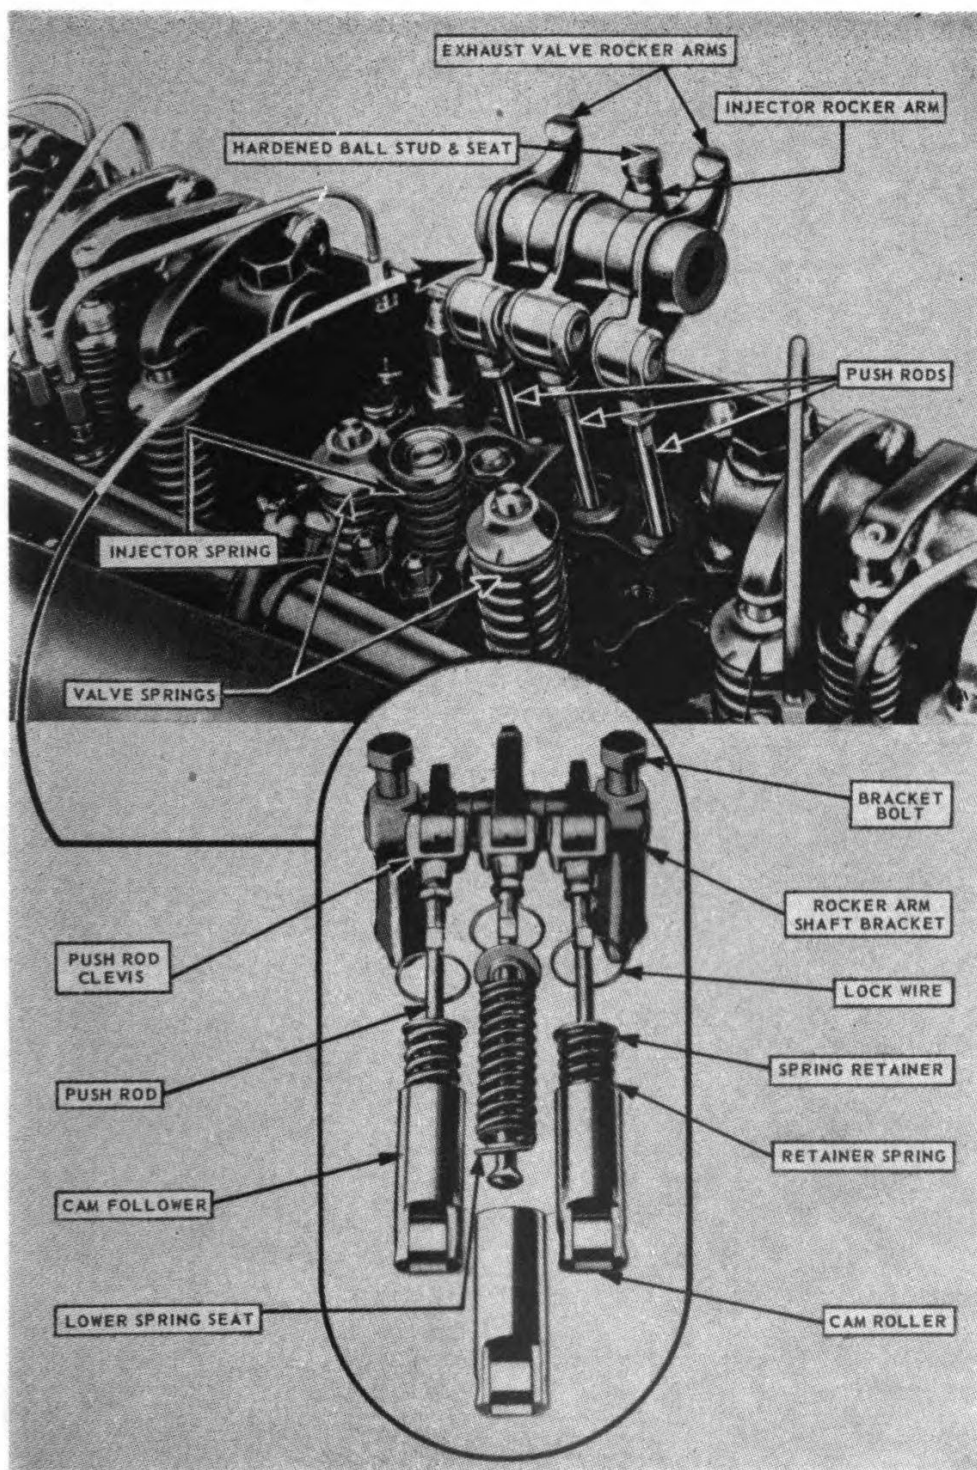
Valve-actuating mechanism (GM 6-71).
